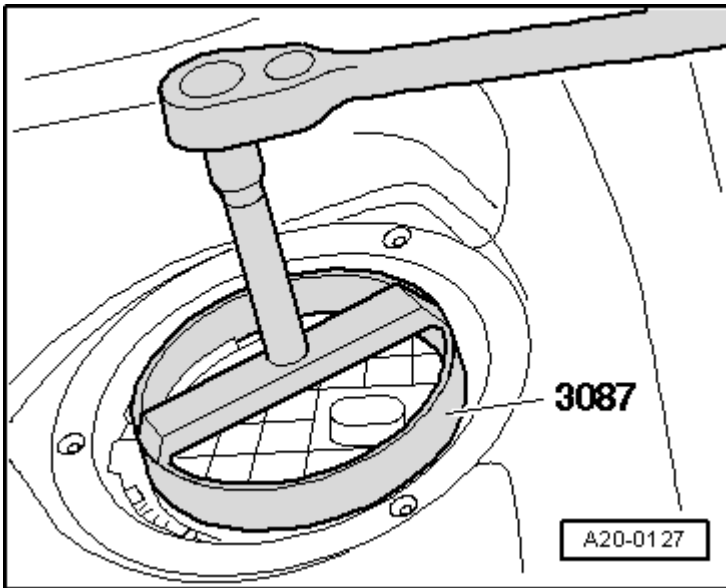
Removing/Installing Locking Ring Using Wrench 3087
